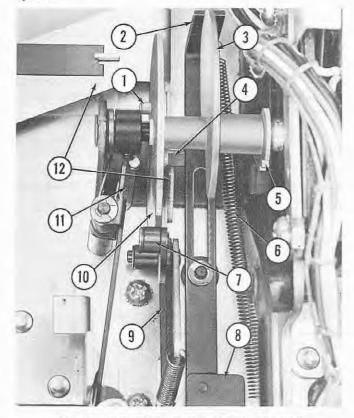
FUNCTIONS, CAM AND PIN ASSEMBLY
